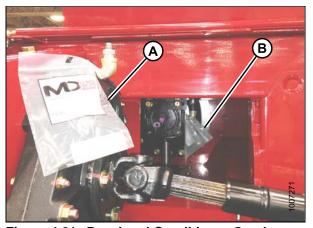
Bevel and Conditioner Gearbox—16 ft. Shown, 13 ft. Similar
